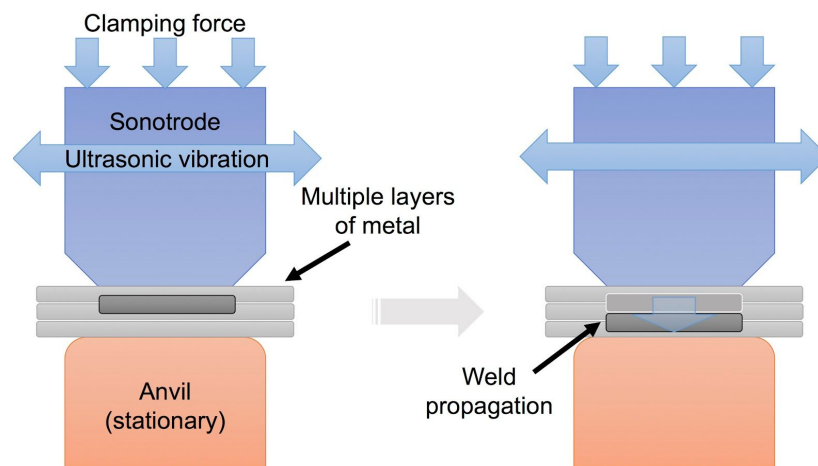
Schematic of ultrasonic metal welding on multiple layers of metal.
